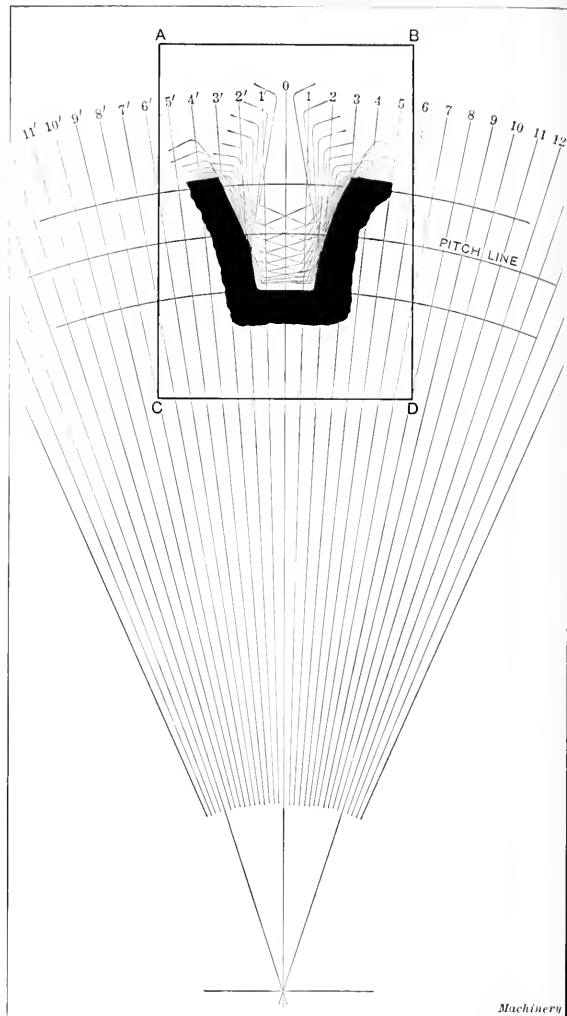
Tracing of Rack Tooth in Various Positions, giving Form of Gear-cutter
